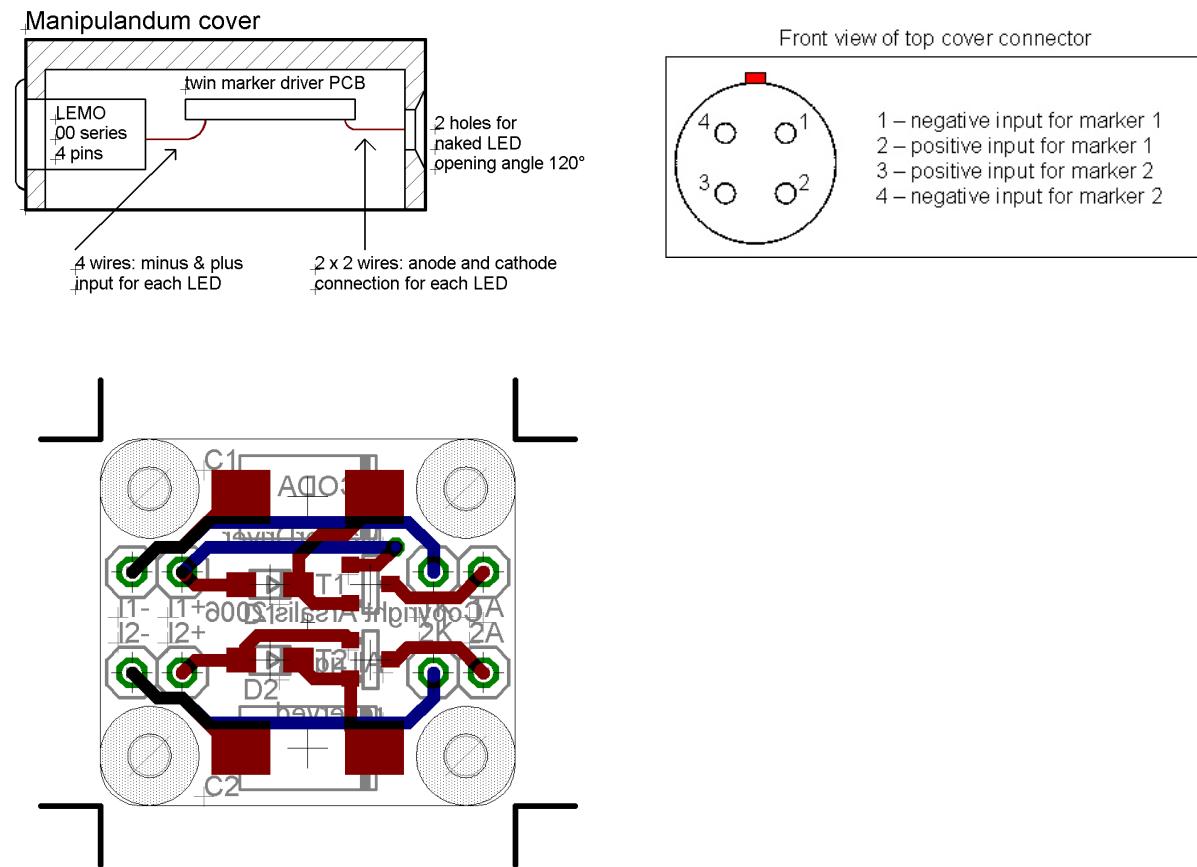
Drawings of cover assembly (top left panel), marker connector pin-out (top right panel), marker driver PCB layout (bottom right panel).
